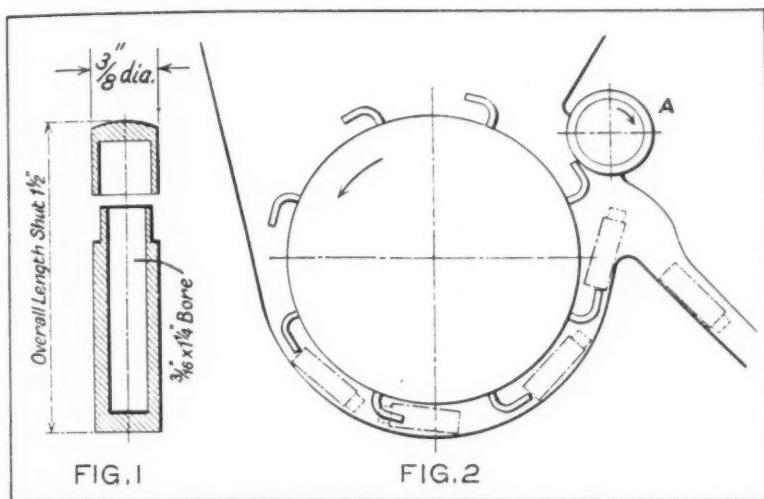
Molded Box for Holding Pencil Leads. Fig. 2. Mechanism for Feeding Boxes Open End Forward
